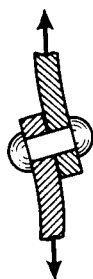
BASIC DESIGNS FOR JOINTS IN FLAT SHEET
